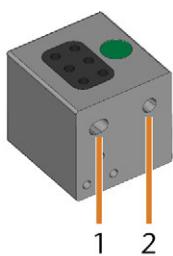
THE 2 HOLES IN A TOOL MAGAZINE
